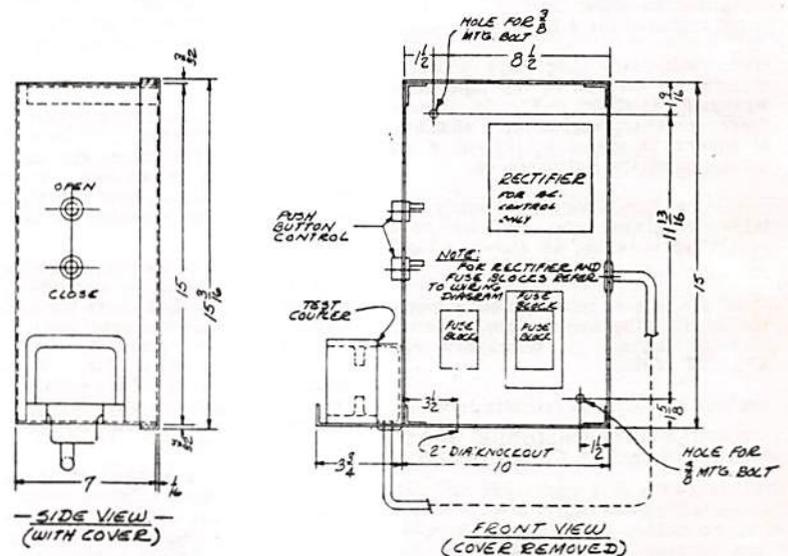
Inspection Box for 13.8 KV Metal-Clad Switchgear
